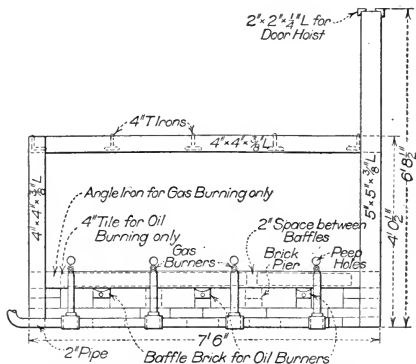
SECTION OF FURNACE SHOWING DIFFERENCE IN REINFORCING OF COMBUSTION CHAMBER FOR GAS AND OIL
